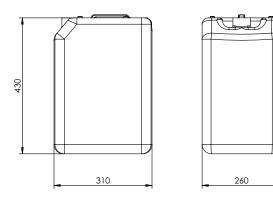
Dimensions of the packaging (60 I and 25 I)
